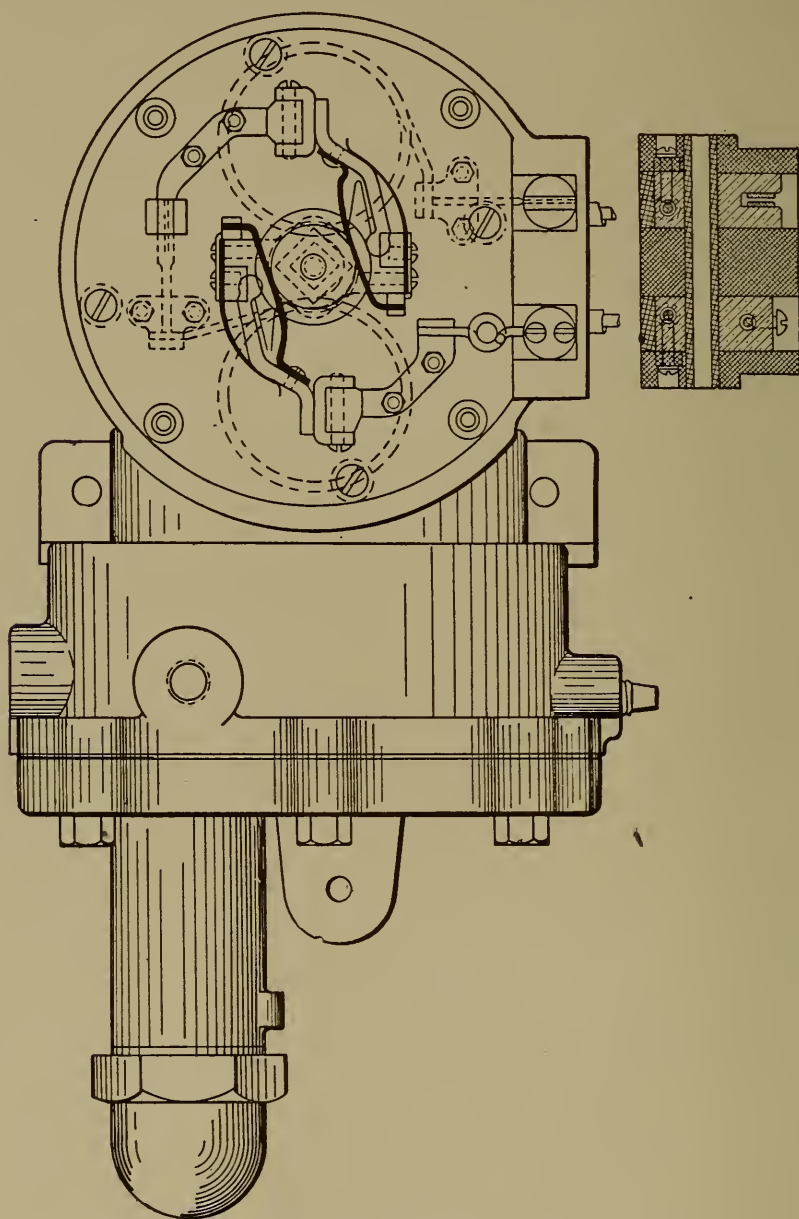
Pump-Governor for Air-Compressor, Front View.
